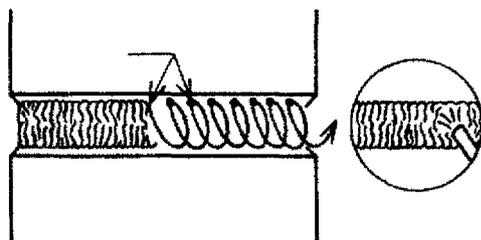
Longer weave used to weld second pass on low-carbon-steel thin-wall pipe.
